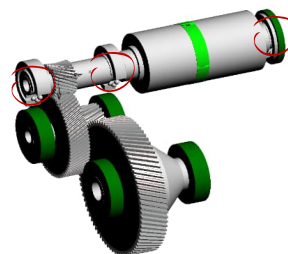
Case3 primary-shaft bearing of e-reducer transmission
